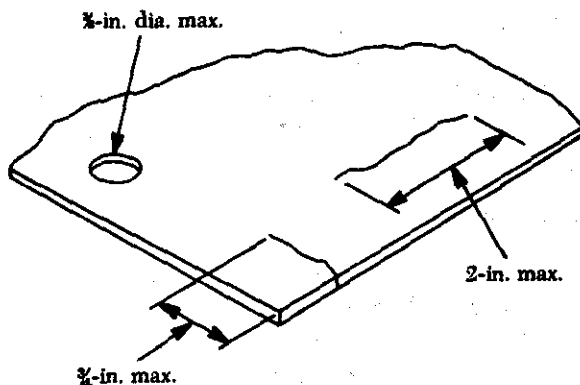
Typical damage to mat molded parts.
